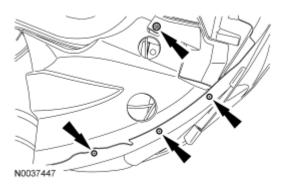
Locating LH Fender Splash Shield Screws Courtesy of FORD MOTOR CO.
